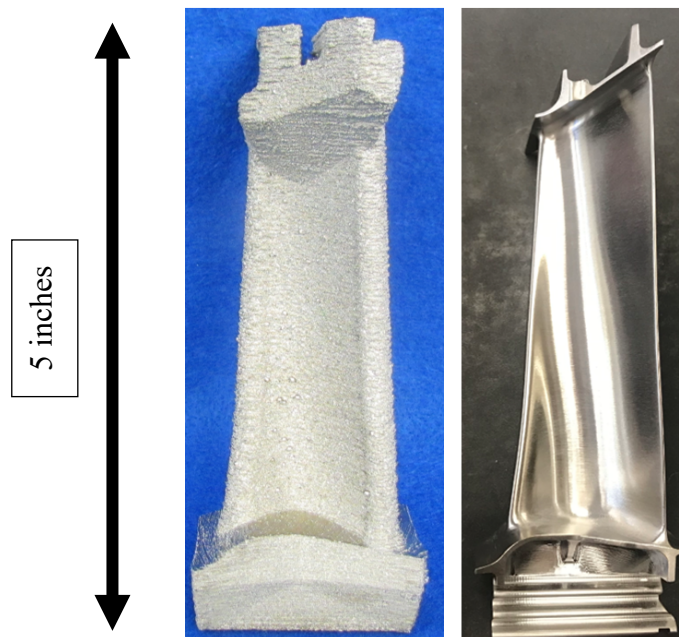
Macro image of oversized “as printed” blades produced with the Electron Beam – Powder Bed Fusion (EB-PBF) process (left) and the finished machined AM turbine blade (right) showing the overall size and shape of the AM turbine blade before and after machining.
